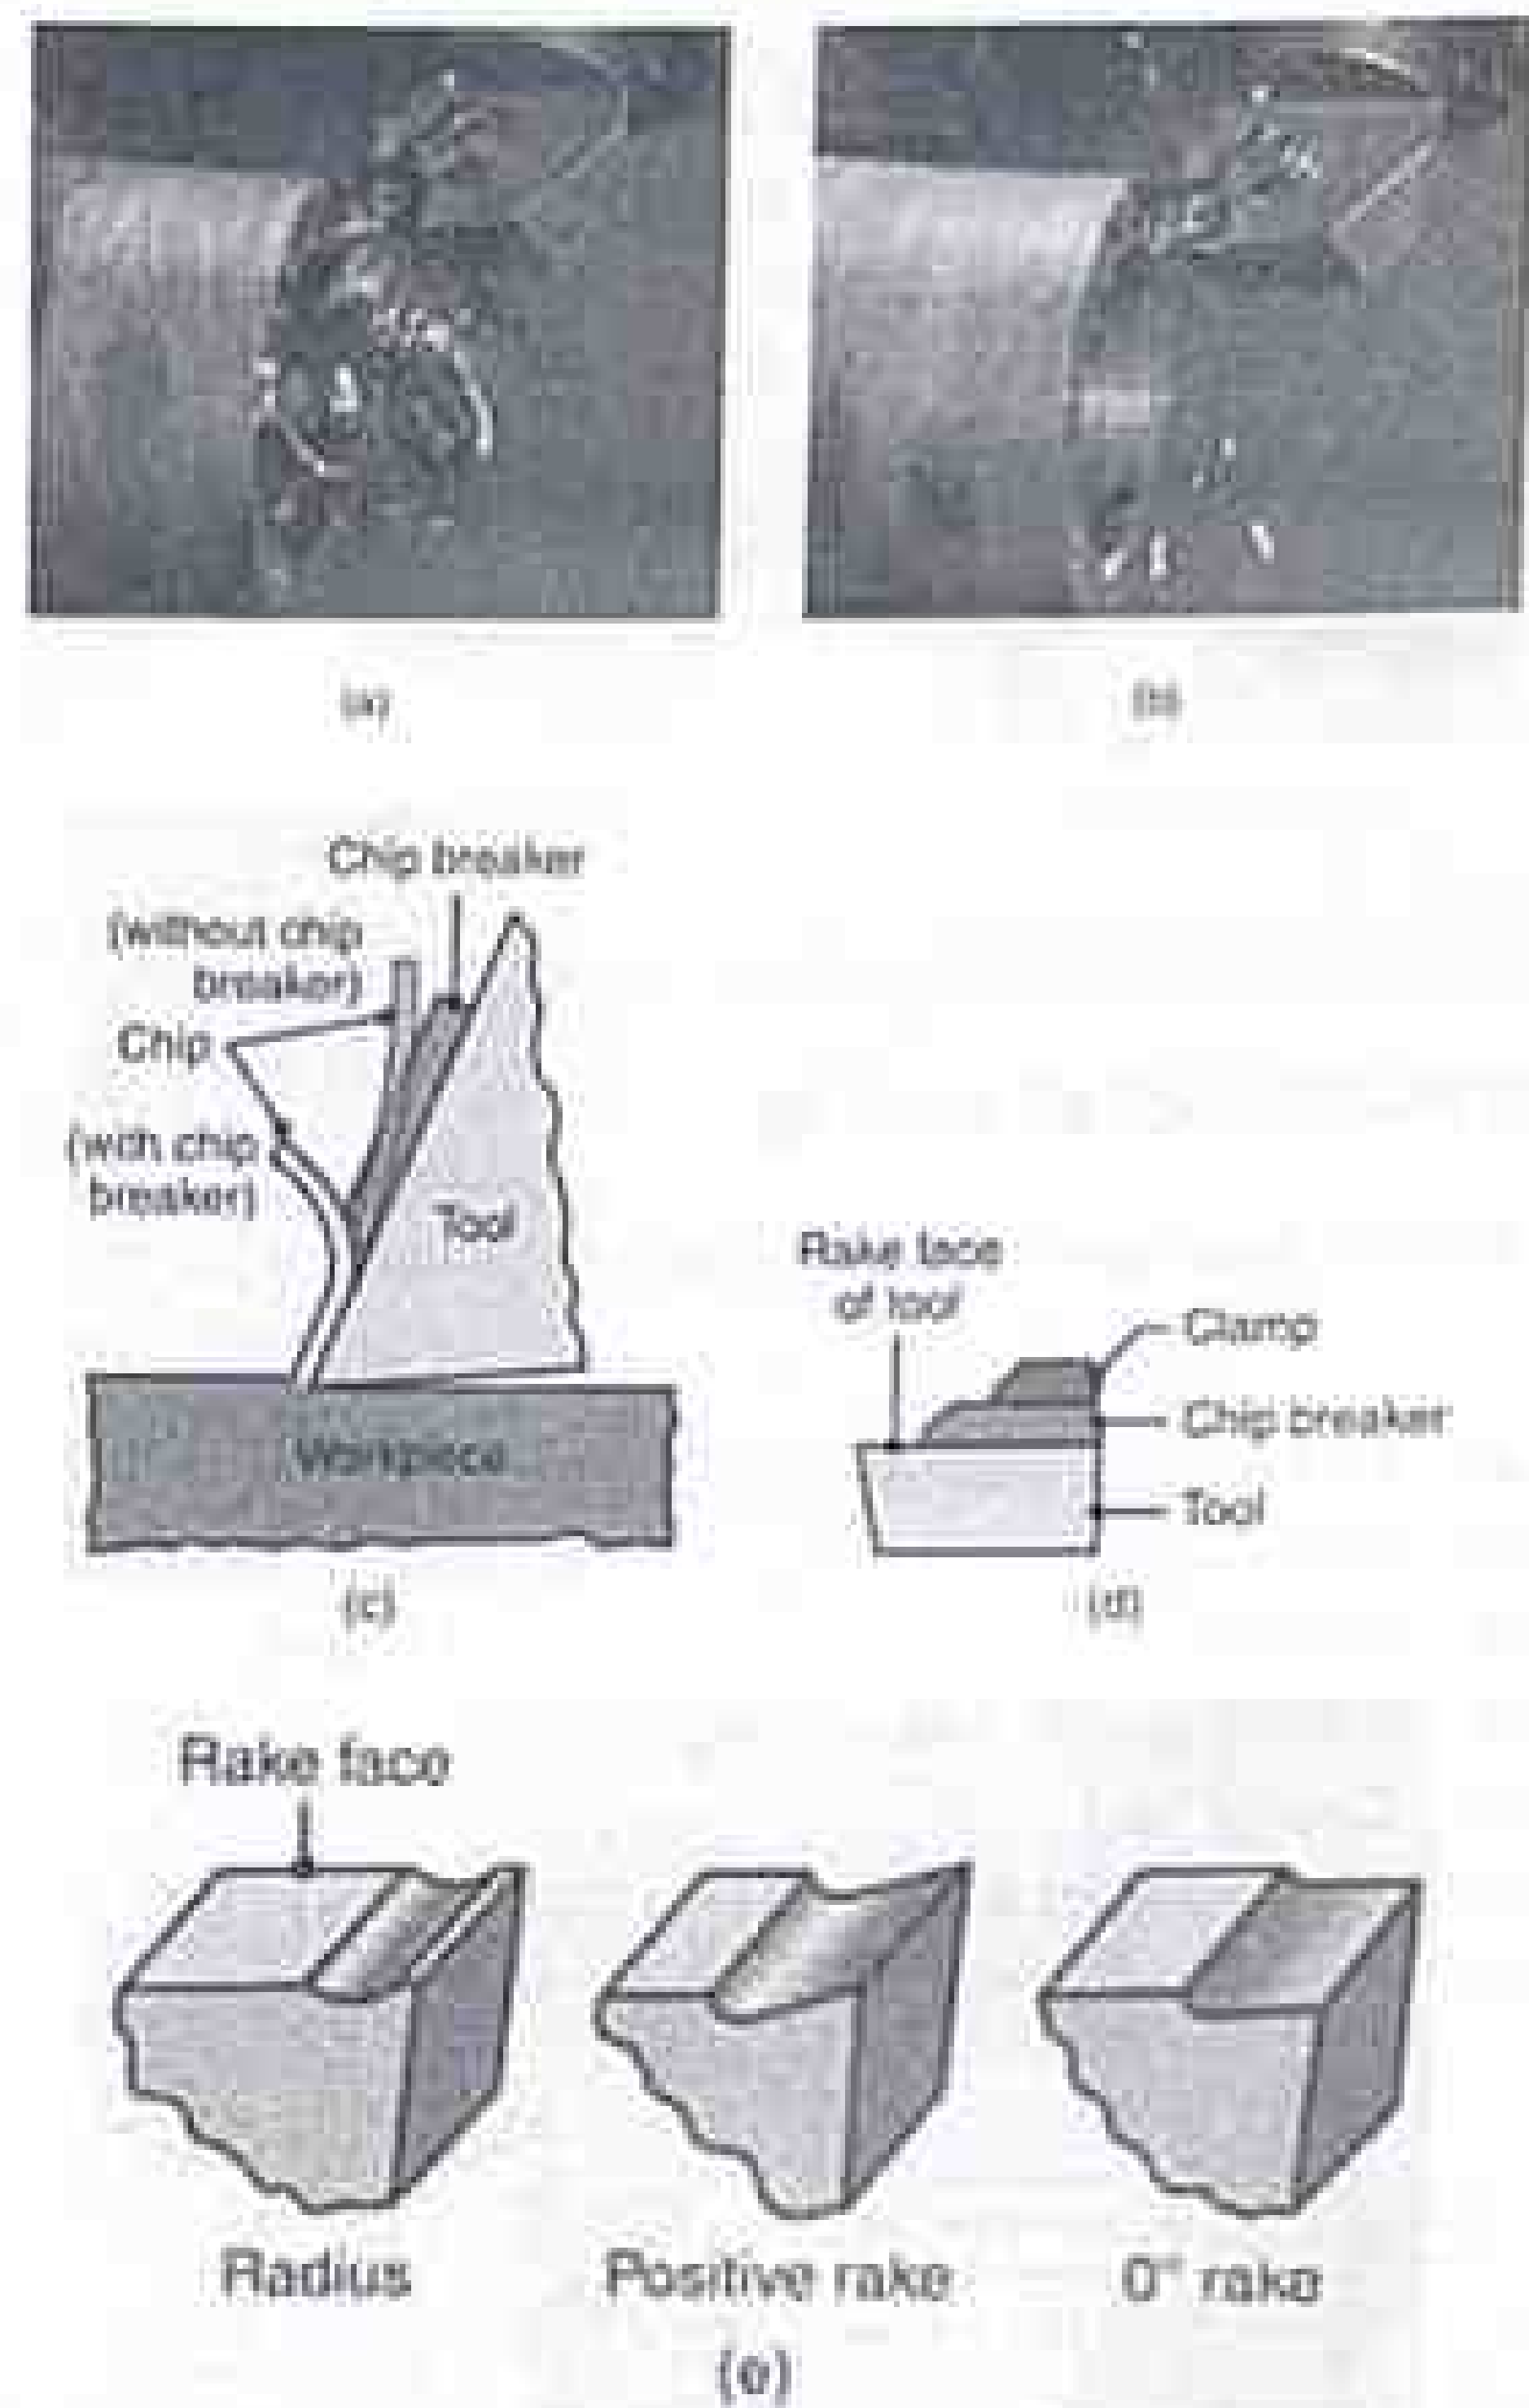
(a) Machining of aluminum using an insert without a chip breaker; note the long chips that can interfere with the tool and present a safety hazard. (b) Machining of aluminum with a chip breaker. (c) Schematic illustration of the action of a chip breaker; note that the chip breaker decreases the radius of curvature of the chip and eventually breaks it. (d) Chip breaker clamped on the rake face of a cutting tool. (e) Grooves in cutting tools acting as chip breakers. Most cutting tools now used are inserts with built-in chip-breaker features.
